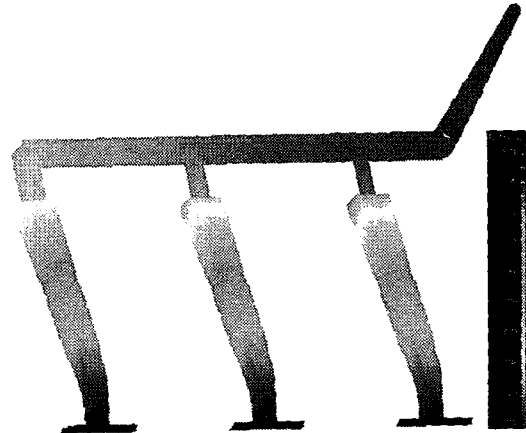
Filling pattern of the balanced runner layout for the 3-cavity mold
